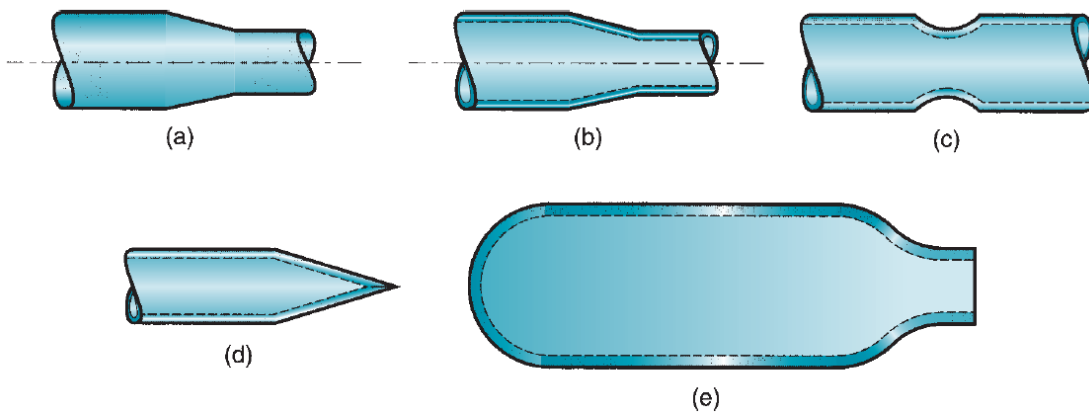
Examples of parts made by swaging: (a) reduction of solid stock, (b) tapering a tube, (c) swaging to form a groove on a tube, (d) pointing of a tube, and (e) swaging of neck on a gas cylinder.
